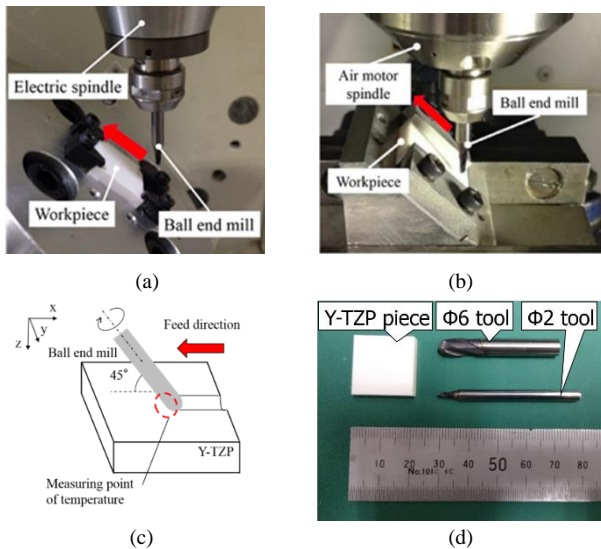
(a) Experimental setup with electric spindle that rotates at speeds up to 50,000 rpm, (b) experimental setup with air motor spindle that rotates at 150,000 rpm, (c) schematic diagram of the machining, (d) workpiece and cutting tools ($\Phi 2$ and $\Phi 6$ mm).
